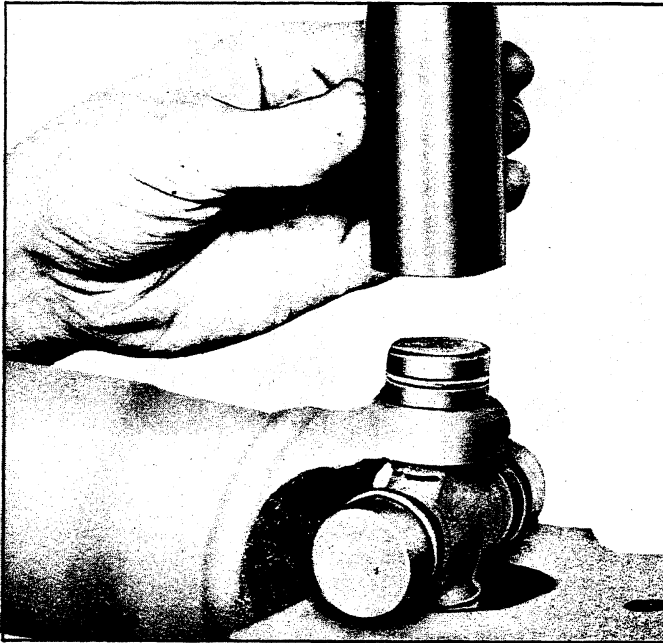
Bearing Partially Pressed from Propeller Shaft
